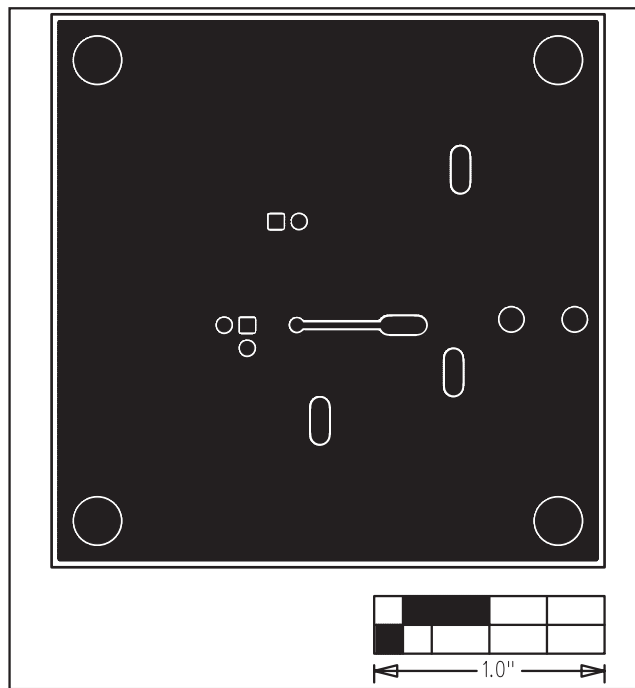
MAX9716 EV Kit PC Board Layout—Solder Side
